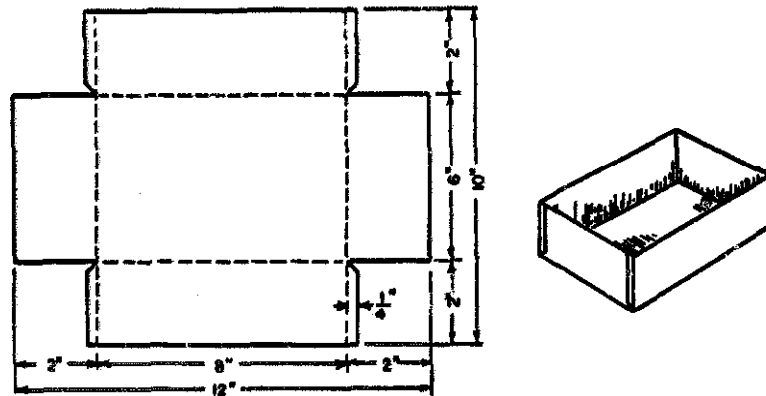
A pan that may be used for small hardware supplies. The seams are soldered.
